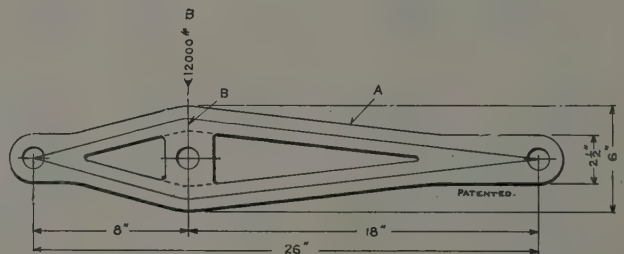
Trussed Brake Lever with Welded-In Strut. Schaefer Equipment Company.
